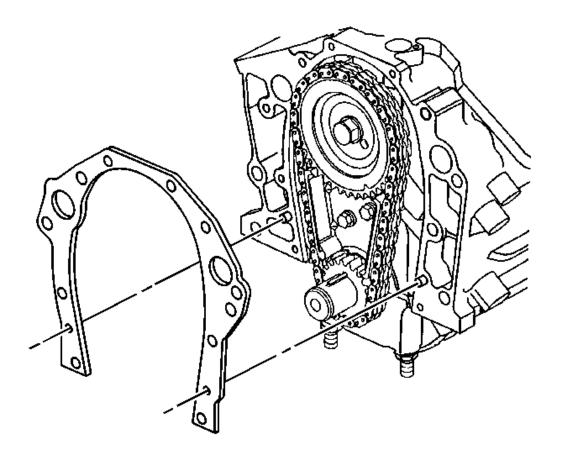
Removing Engine Front Cover Gasket Courtesy of GENERAL MOTORS CORP.
